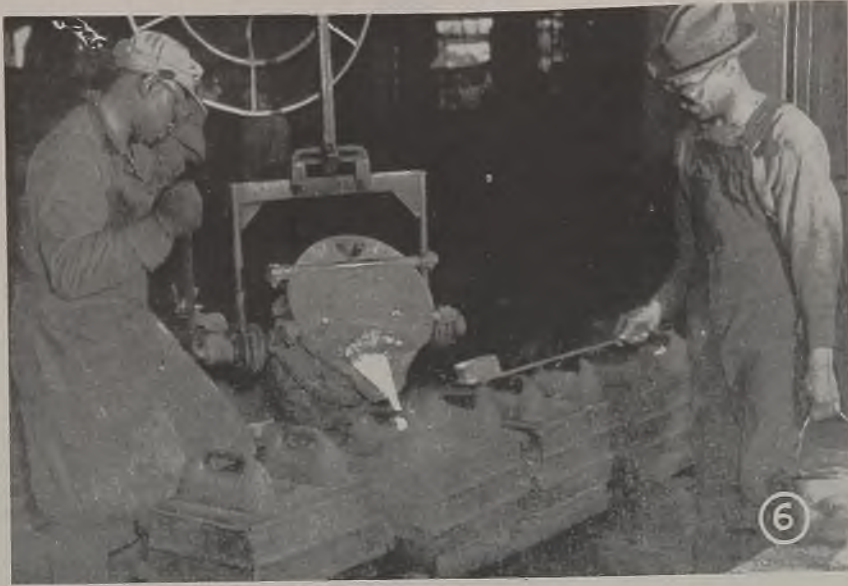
Pouring squeezer molds from monorail shanking ladle
